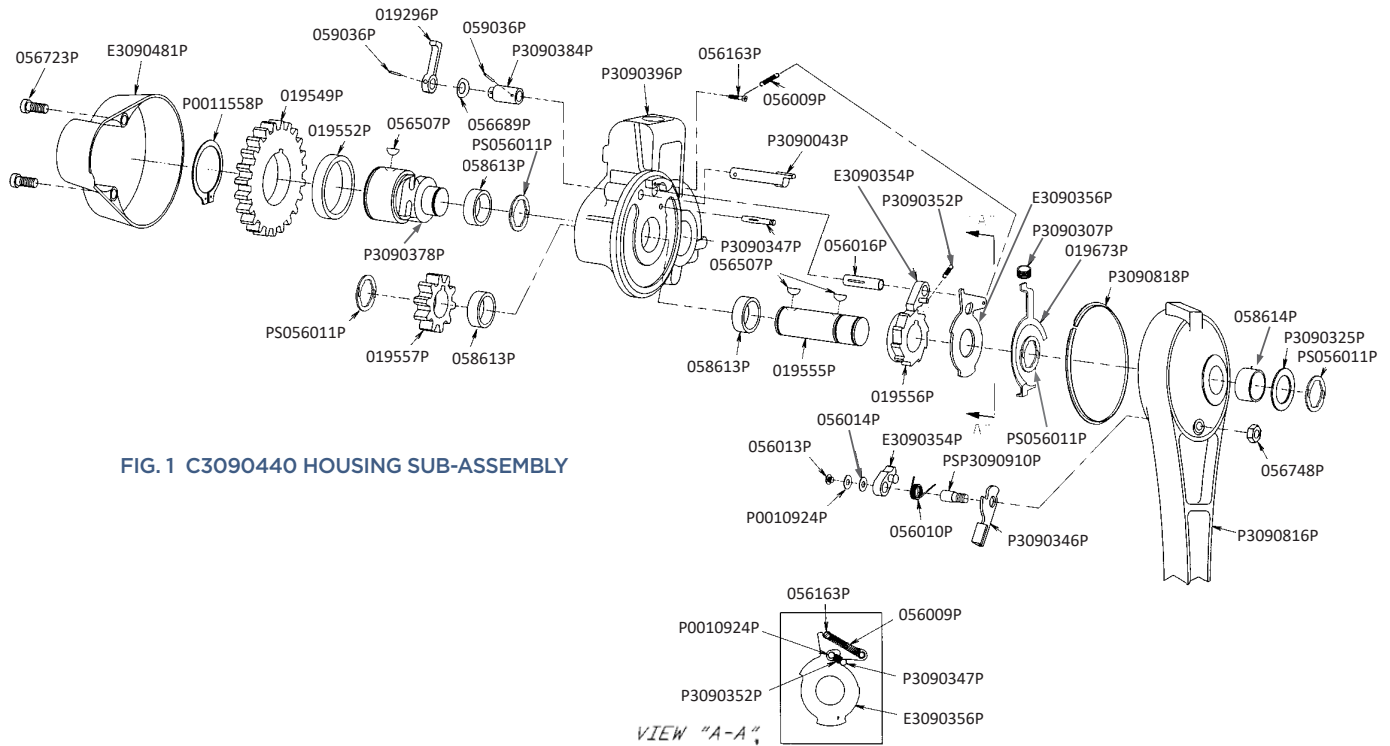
C3090440 HOUSING SUB-ASSEMBLY
